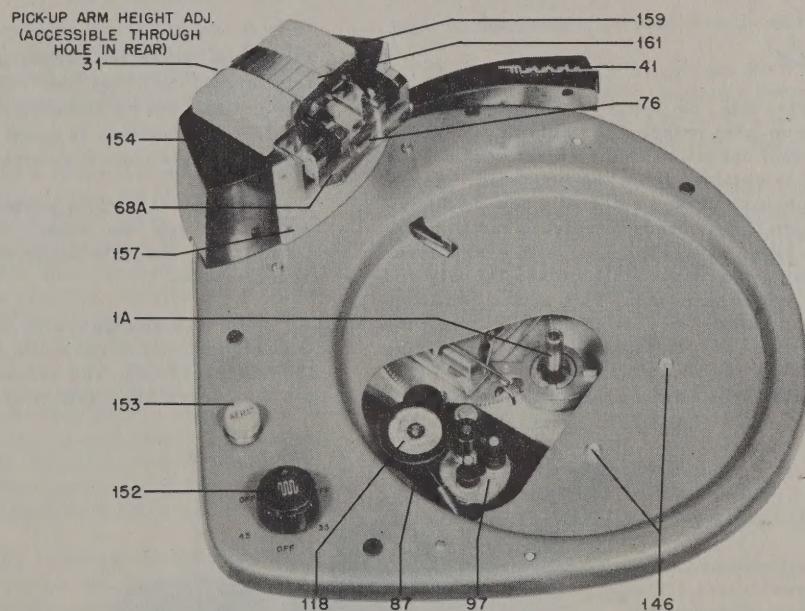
TOP VIEW OF RECORD CHANGER WITH TURNTABLE REMOVED
